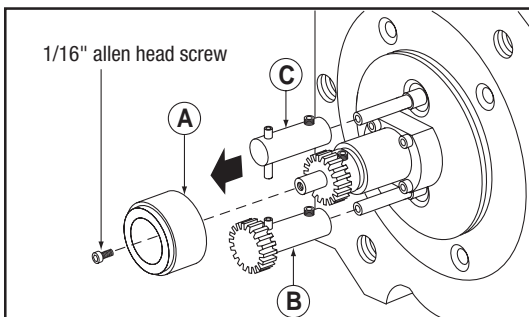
Removing Magnet Assembly (A), Oil Slinger (B) & Oil Slinger Hub (C)
